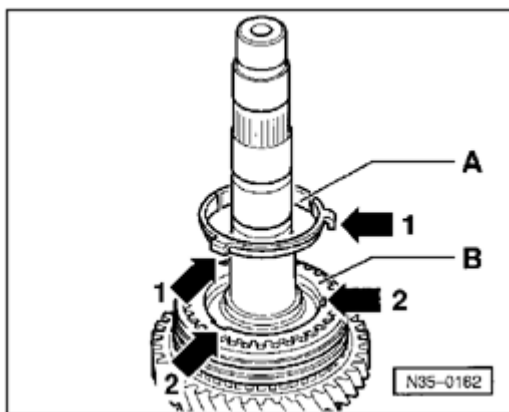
Installation position synchro-ring (inner ring for 1st or 3rd gear) -A-
